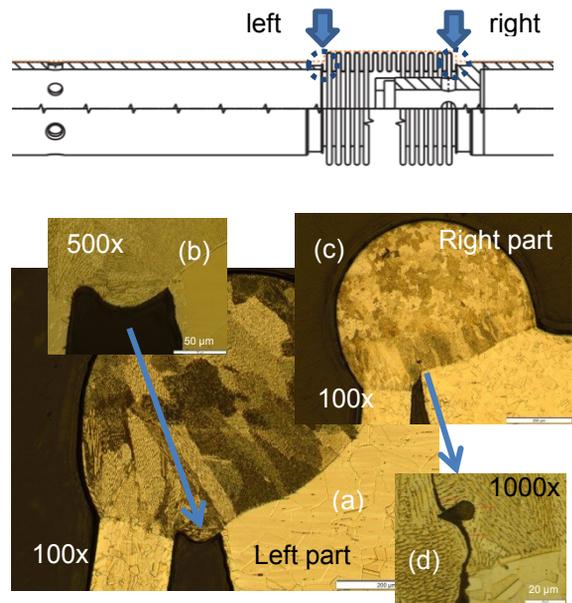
Warm internal conductor: Pipe-bellow stainless steel welding joint. Fa. CPI.
